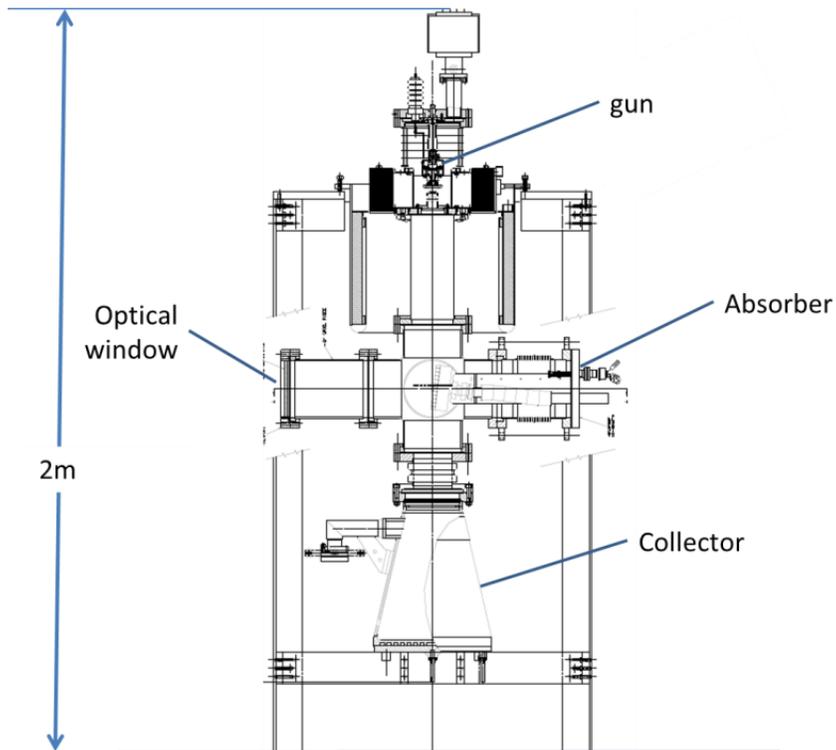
Drawing of test stand; turbo pump is perpendicular to the plane of the drawing on the opposite side shown (into page).
